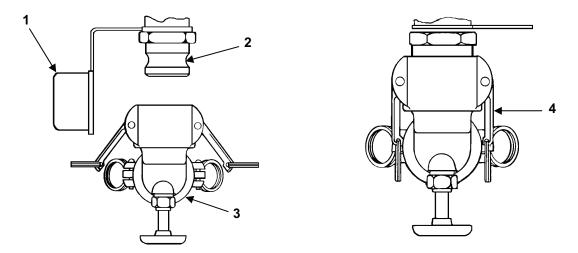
Coupler Valve Installed and Locked Onto Adapter Assembly.
